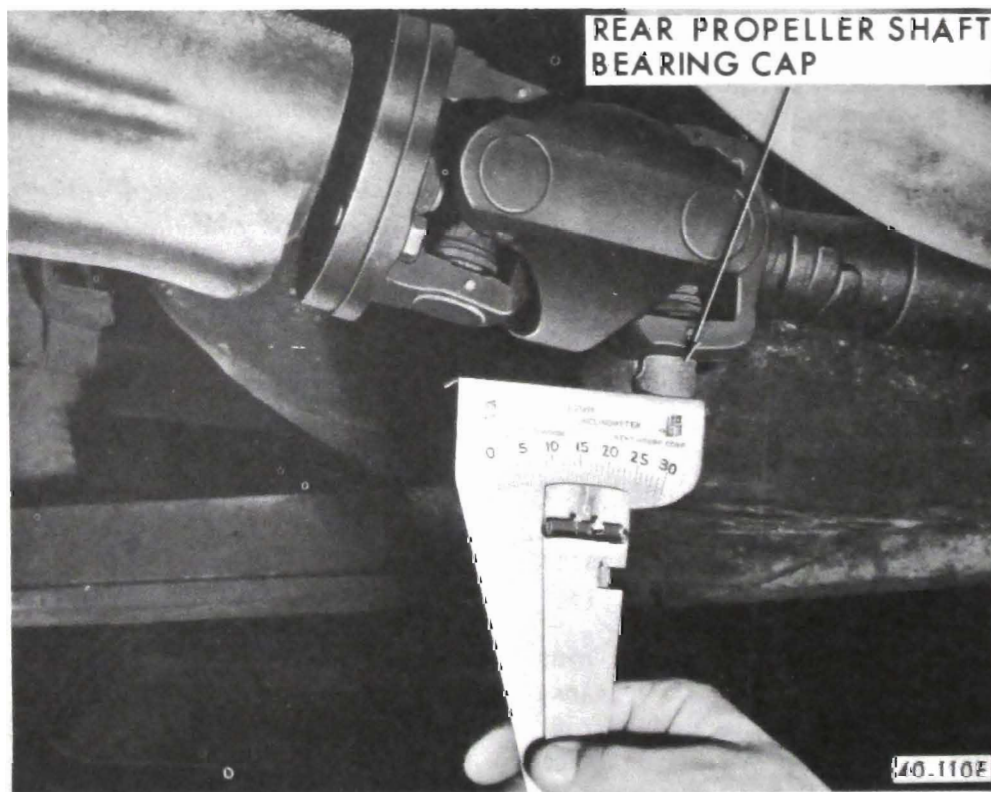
A Measuring Angle at Rear of Propeller Shaft
